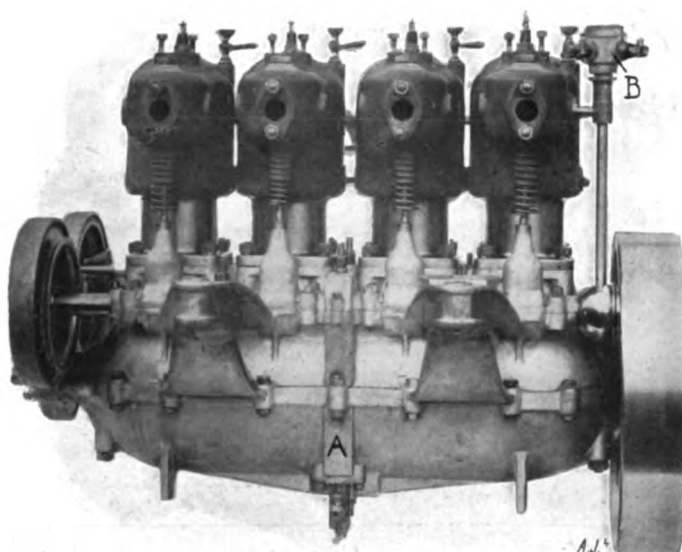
View of the four-cylinder 24-30-h.p. engine, which is fitted to the Prunel Chassis, showing the positions of the lubricating oil-pump, A, and of the gear-driven commutator, B.
